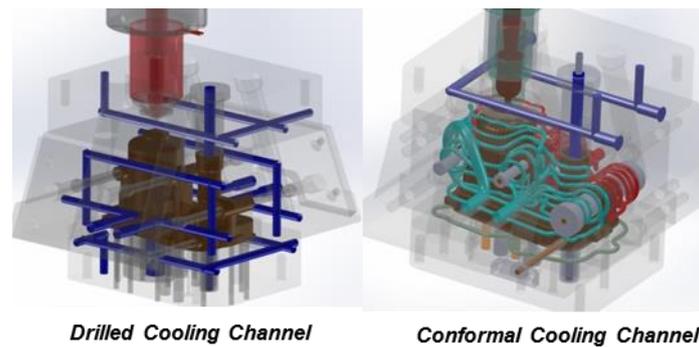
Comparison in cooling channel design: former mold with drilled cooling channels and new mold with conformal cooling channels
